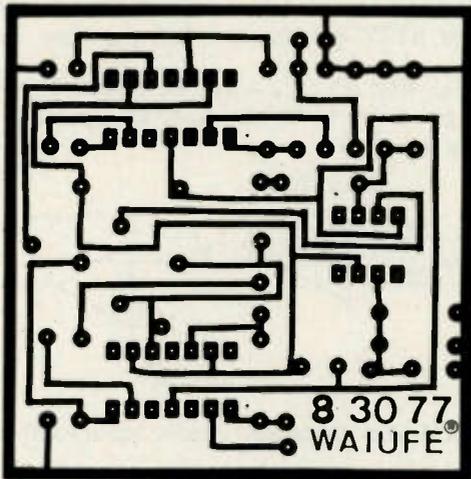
Audio/digital processor board. Board is 2 1/2" x 2 1/2". Foil side view.
